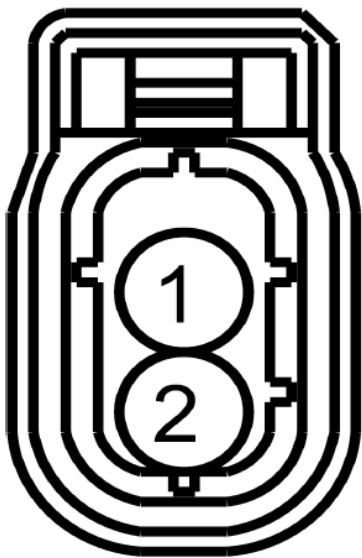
Secondary Fuel Sender Connector End View (C3270)
